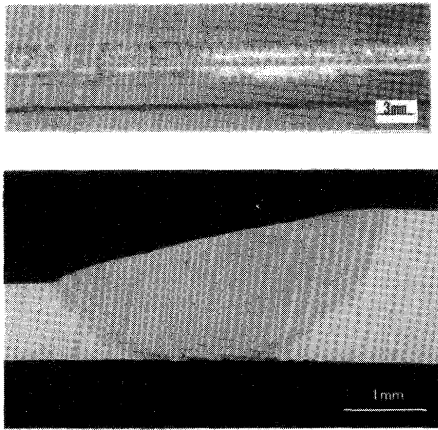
Typical example of lap-fillet welding bead of AA5022
